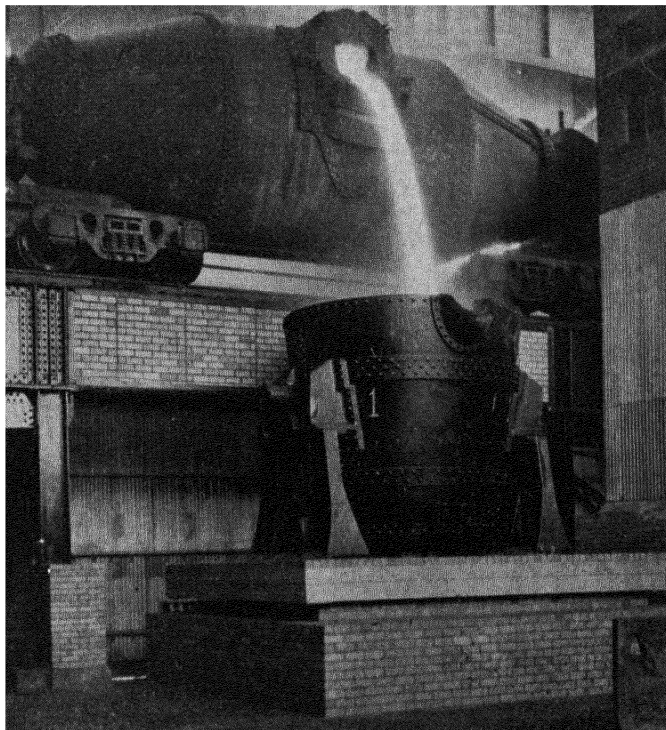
Pouring hot metal into open-hearth transfer ladle. (Courtesy of The American Rolling Mill Company)
